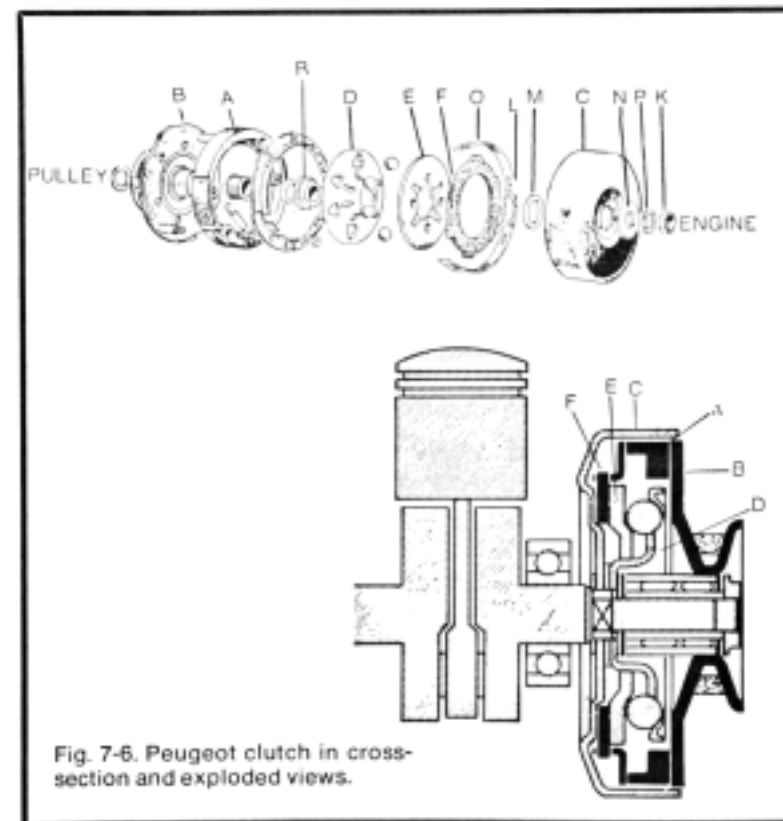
Peugeot clutch in cross-section and exploded views.
